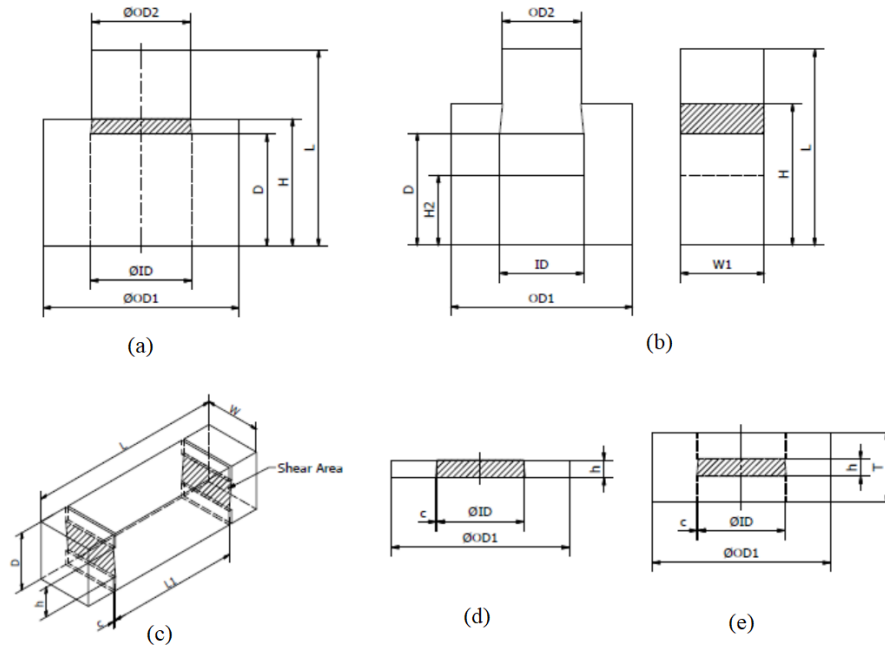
Geometry of specimens: (a) circular hat-shaped (C-HS), (b) flat hat-shaped (F-HS), (c) double-notch (D-N), (d) punch without notch (P-nN), and (e) punch with notch (P-N).
